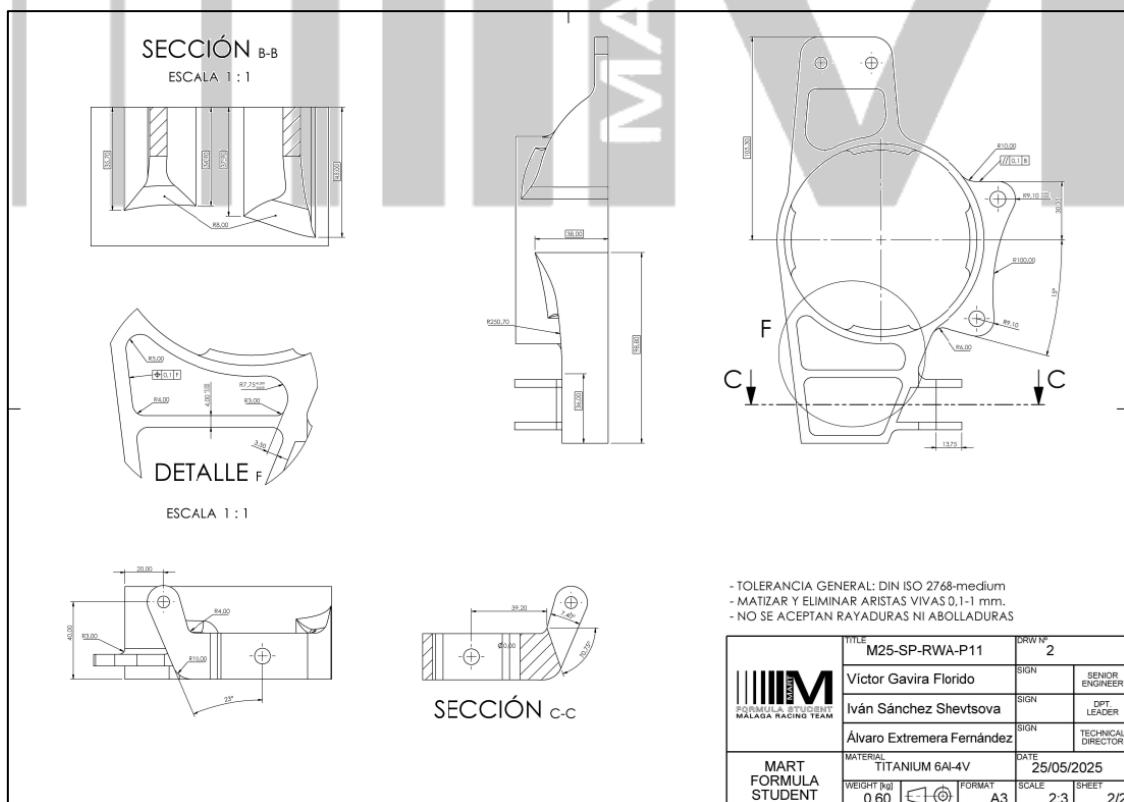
Second Sheet of the Rear Upright's Manufacturing Drawing.
